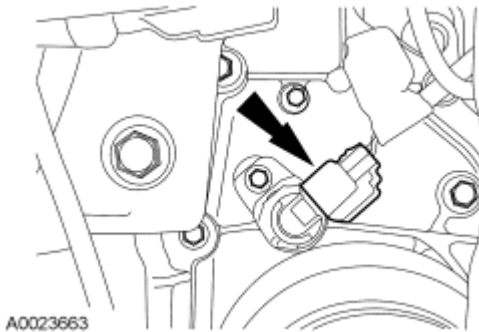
Turbine Shaft Speed (TSS) Sensor Connector
